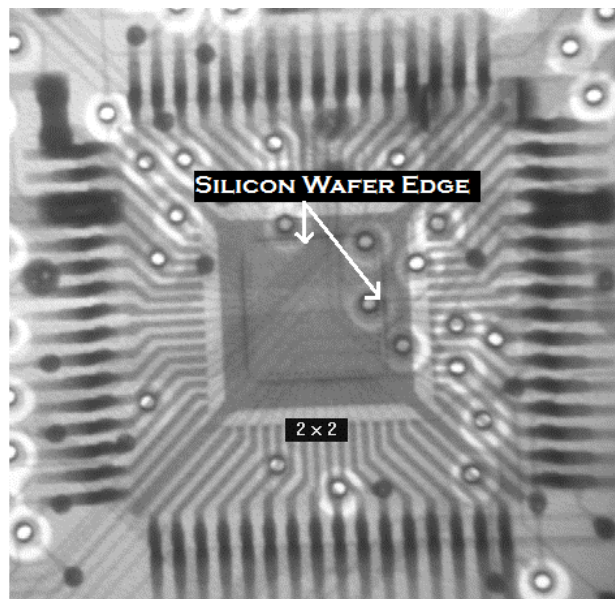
X-ray image of a surface mounted integrated circuit. Image taken by a Glenbrook Jewelbox 70T X-ray Inspection System with GTI-500 software. The image clearly shows the outline of the silicon die within the outer packaging. Using a reference measurement, the software can be calibrated to enable direct measurements of the die in the image.
